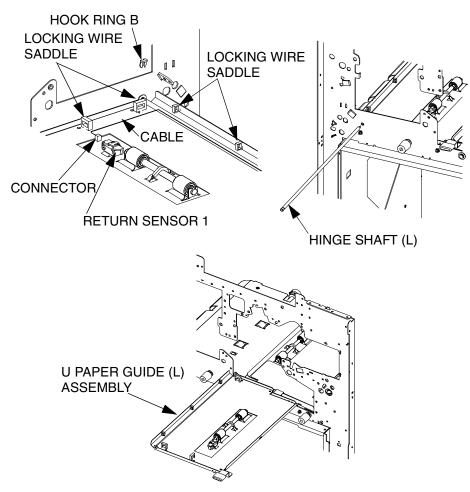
Removal of the U Paper Guide (L) Assembly
